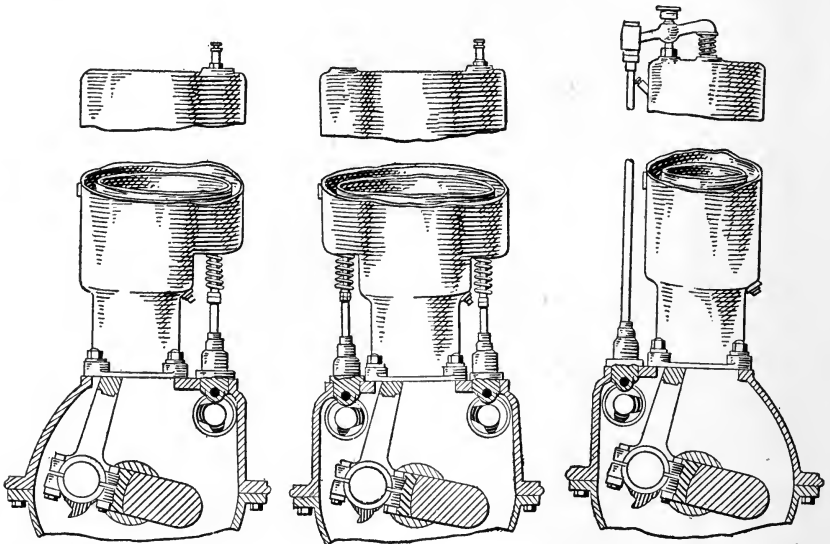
Ell-head cylinder.    FIG. 214.—Tee-head cylinder.    FIG. 215.—Valves-in-the-head cylinder.
